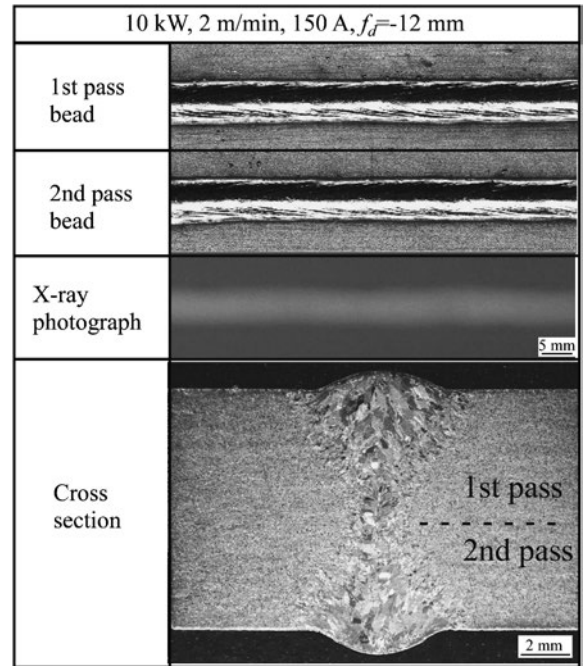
Bead appearances, X-ray radiographs and cross sections of one pass both side weld beads by hybrid welding of pure titanium plate of 12 mm in thickness at 10 kW, 150 A, 2 m/min and $f_d = -12$ mm.
